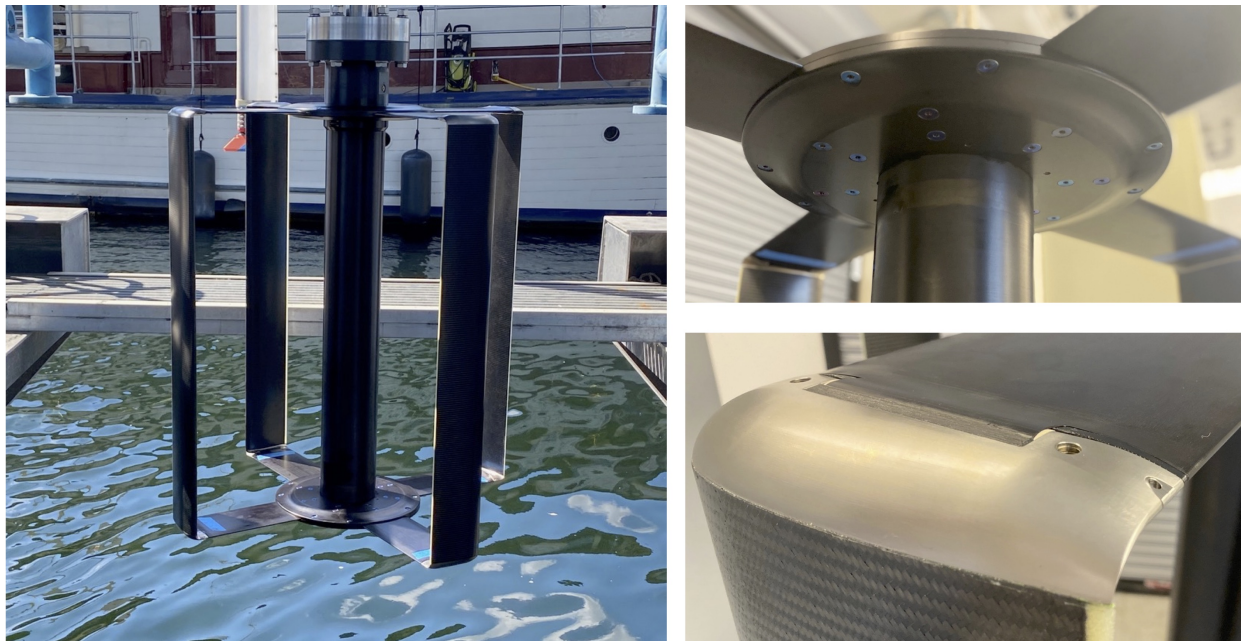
(left) The 2nd generation rotor assembled and installed on *RDL* prior to performance testing. (top right) The upper endplate, shaft, and struts. (bottom right) One hinge/strut assembly.
